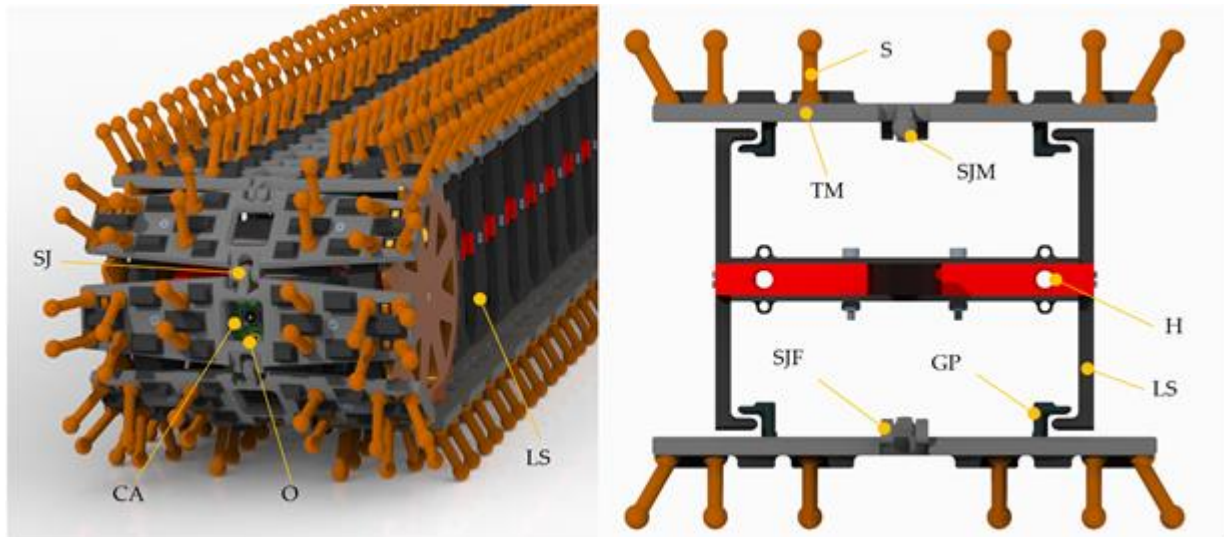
Detail of the track modules with a central opening (O) for camera vision (left); transversal section of the track guidance system (right).
